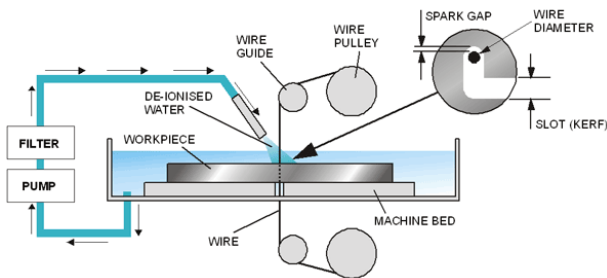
Wire electrical discharge machining (WEDM) [12]
